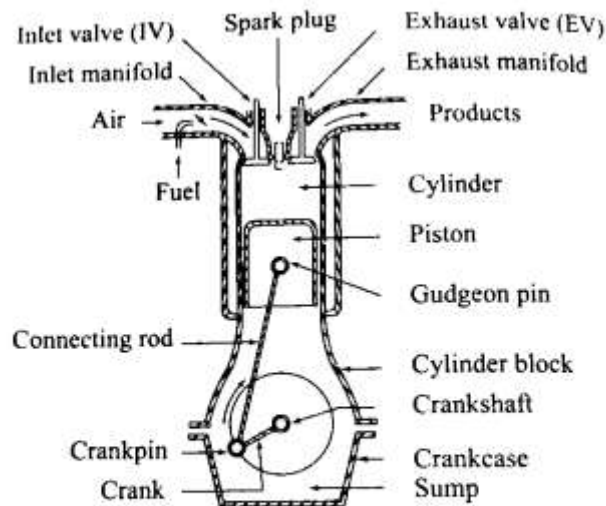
Cross-section of a Spark-Ignition Engine
